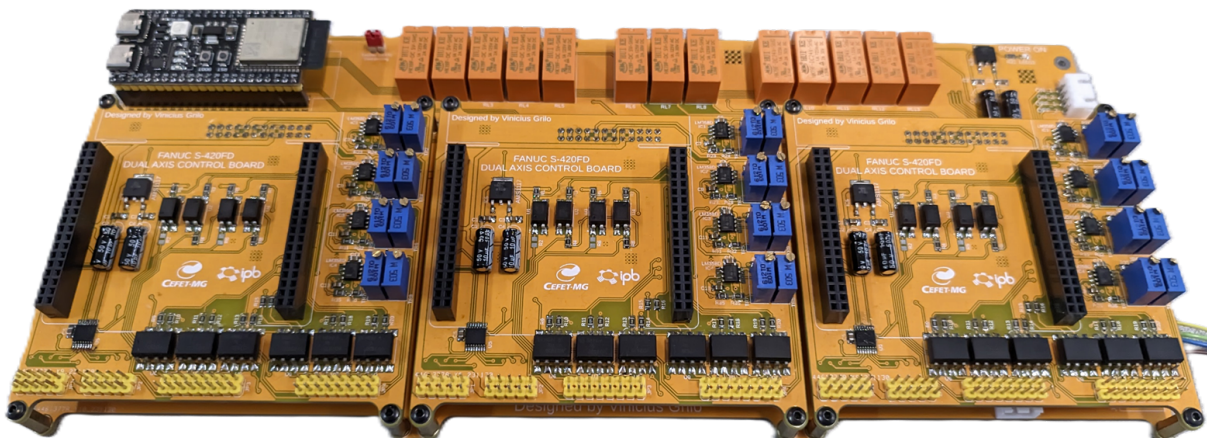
Main Board PCB with three Dual Axis Control Boards attached.
